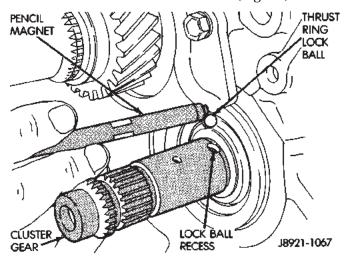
Install Fifth Gear Thrust Ring Lock Ball
